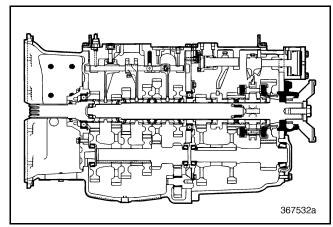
Rear Mainshaft Bearing Cover Component Locator (T313L/T318L Shown)
